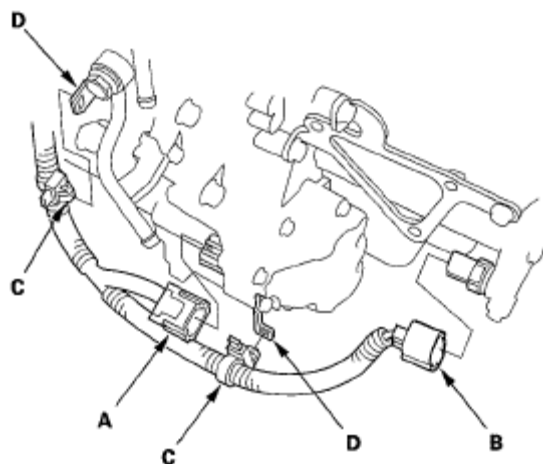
Identifying Shift Solenoid Connector, 3rd Clutch Transmission Fluid Pressure Switch Connector, Clamps And Clamp Brackets
